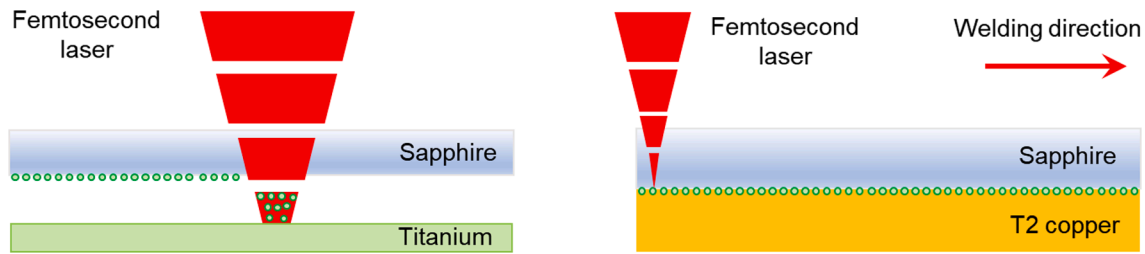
Schematic diagrams for welding after femtosecond LIBT of coating.
